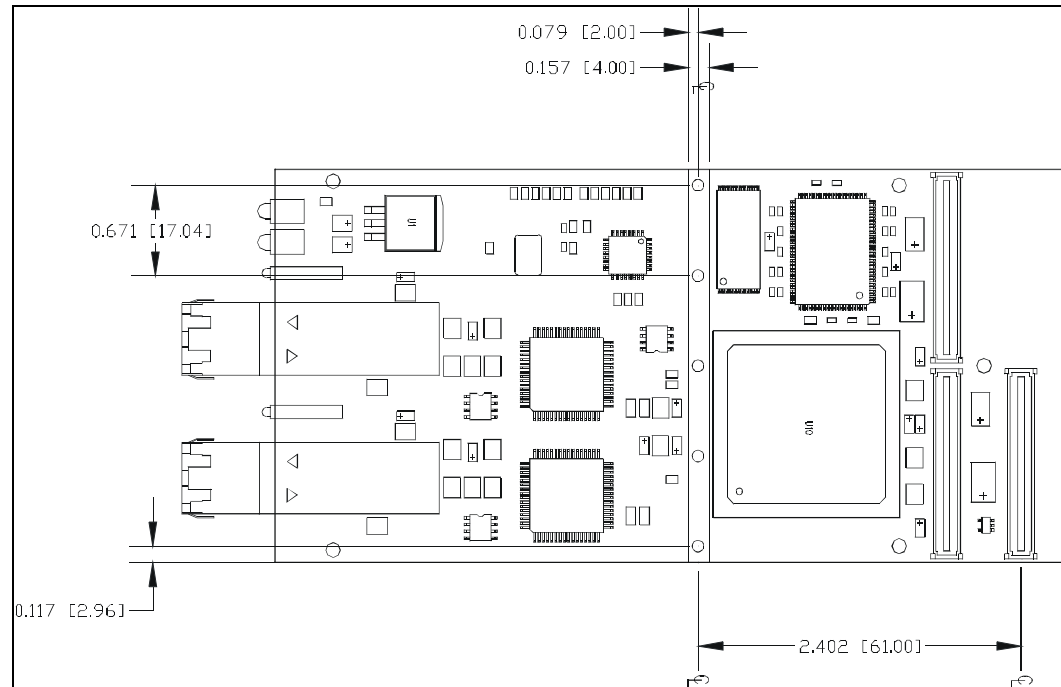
Mechanical Dimensions of FX200 DC PMC
